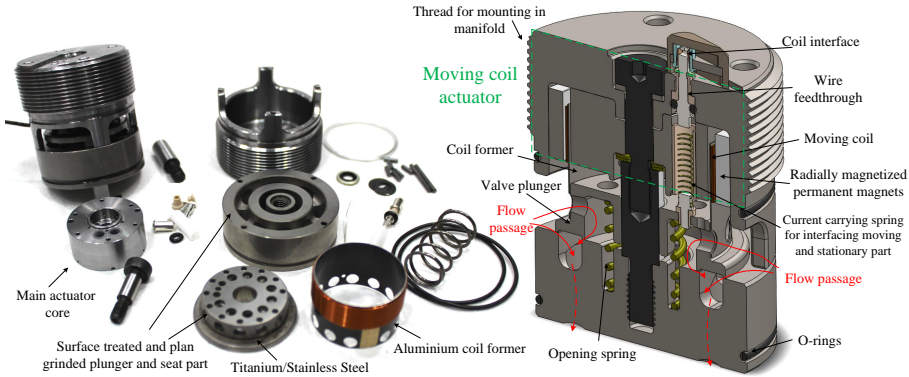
Picture of moving coil actuated prototype parts (left) and a sectional view from a CAD-model (right). This figure is also published in Paper D
